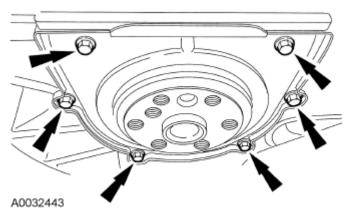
Locating Crankshaft Rear Seal Bolts Courtesy of FORD MOTOR CO.
